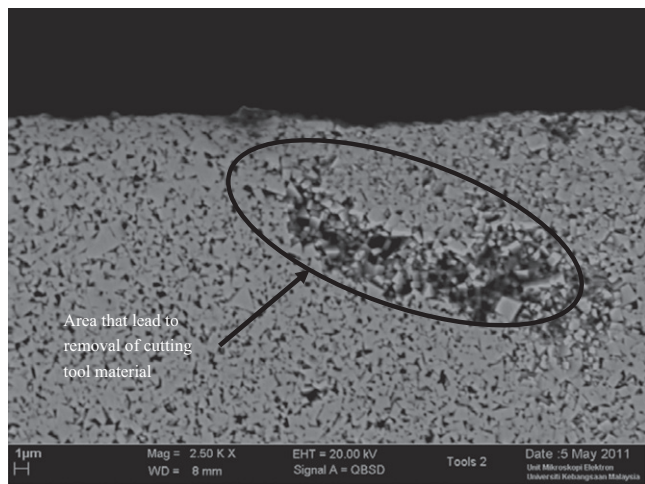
Higher magnification of cutting tool surface that experienced wear.
